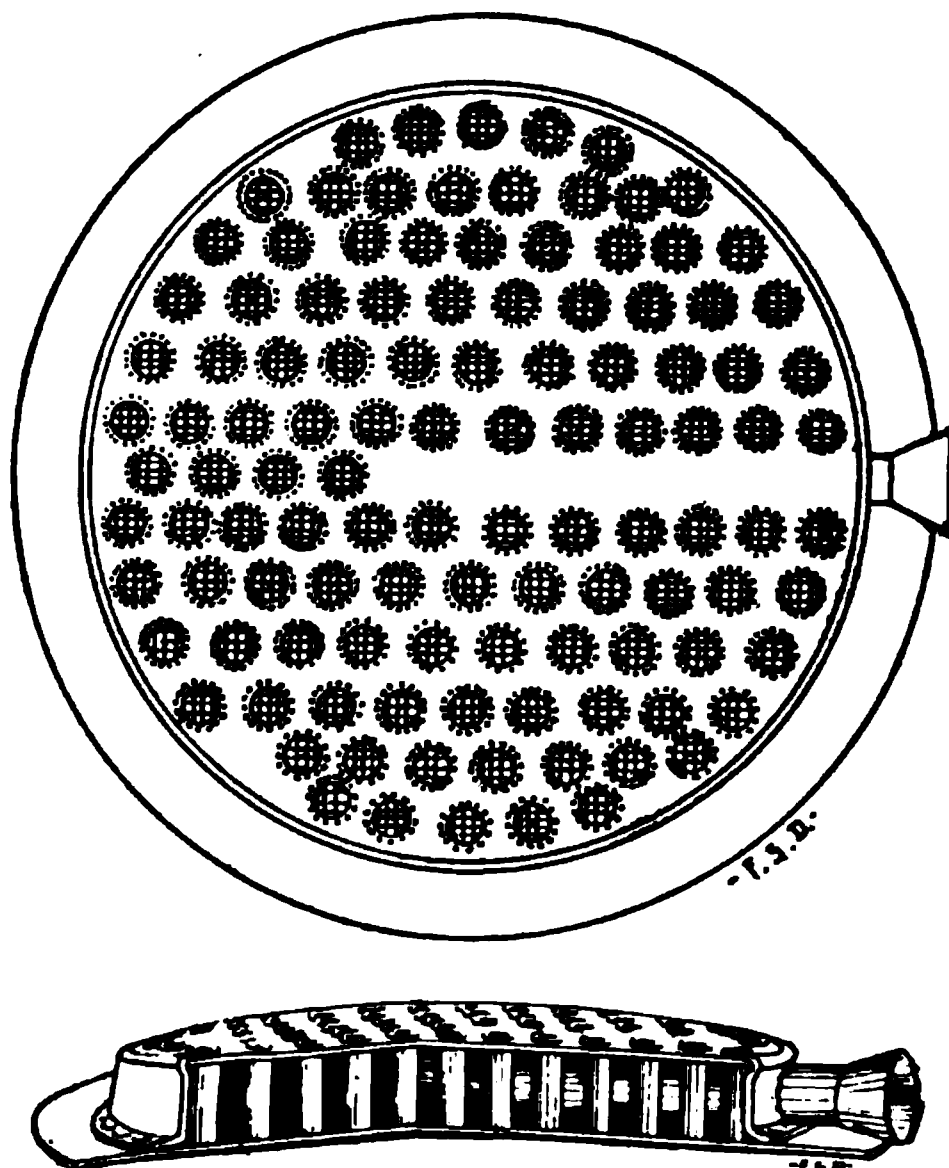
Plan and Part Section of a typical Gasoline Burner for Steam Carriage Use.
